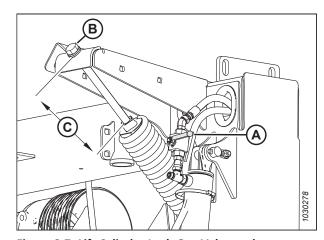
Lift Cylinder Lock-Out Valve and Adjuster Bolt
